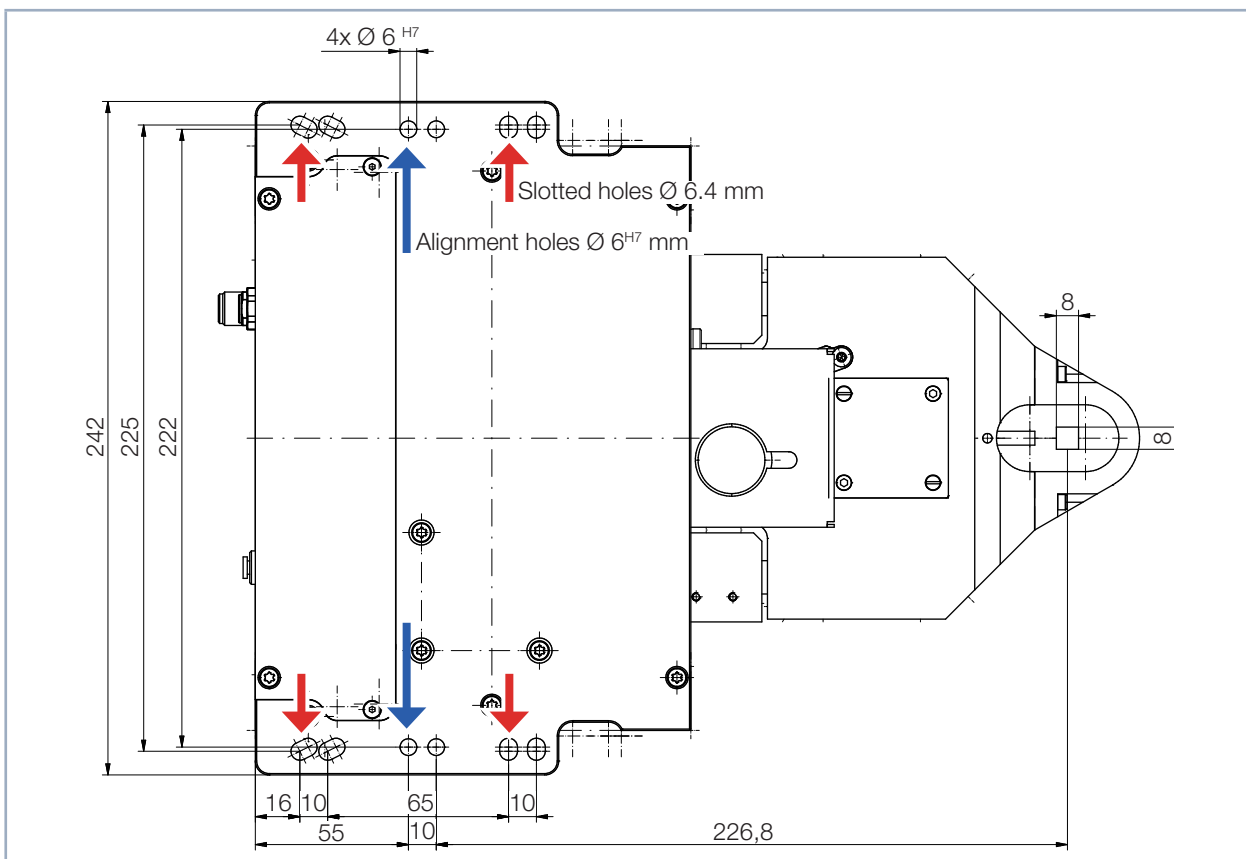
Mounting holes, view from above (same hole pattern below)
